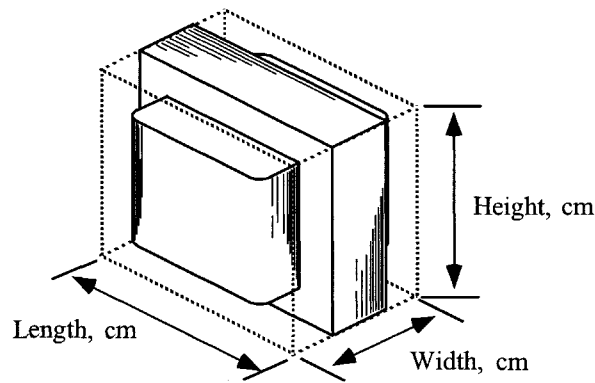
Typical EE or EI Transformer Outline, Showing the Surface Area.
